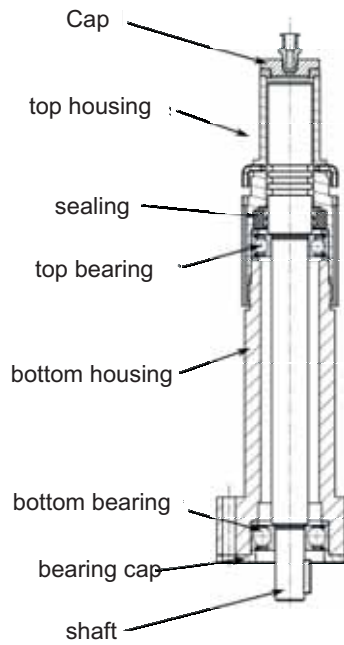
Technical drawing of the Couette system [Hamilton 12].
